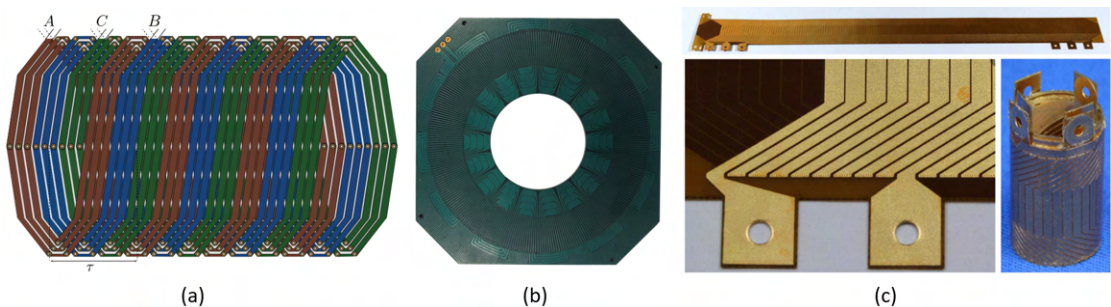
Printed Circuit Board (PCB) windings: (a) rigid PCB winding for linear machine [82]; (b) rigid PCB winding for rotating axial flux machine [83]; and (c) rolled Flex-PCB winding for rotating radial flux machine [62].
